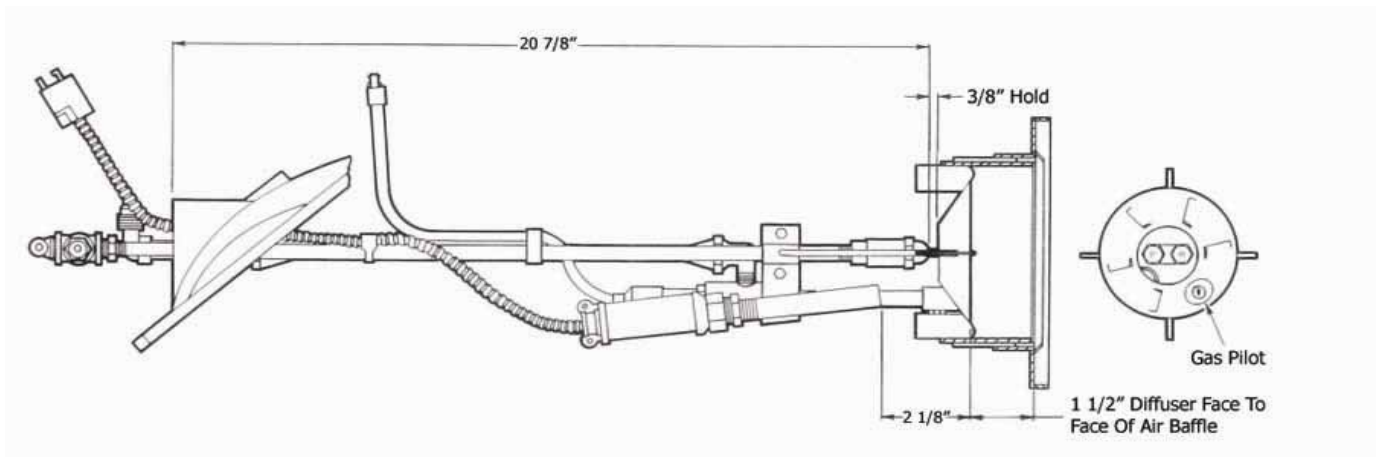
FPLG 25, 28, 36, & 42 Drawer Dimensions
